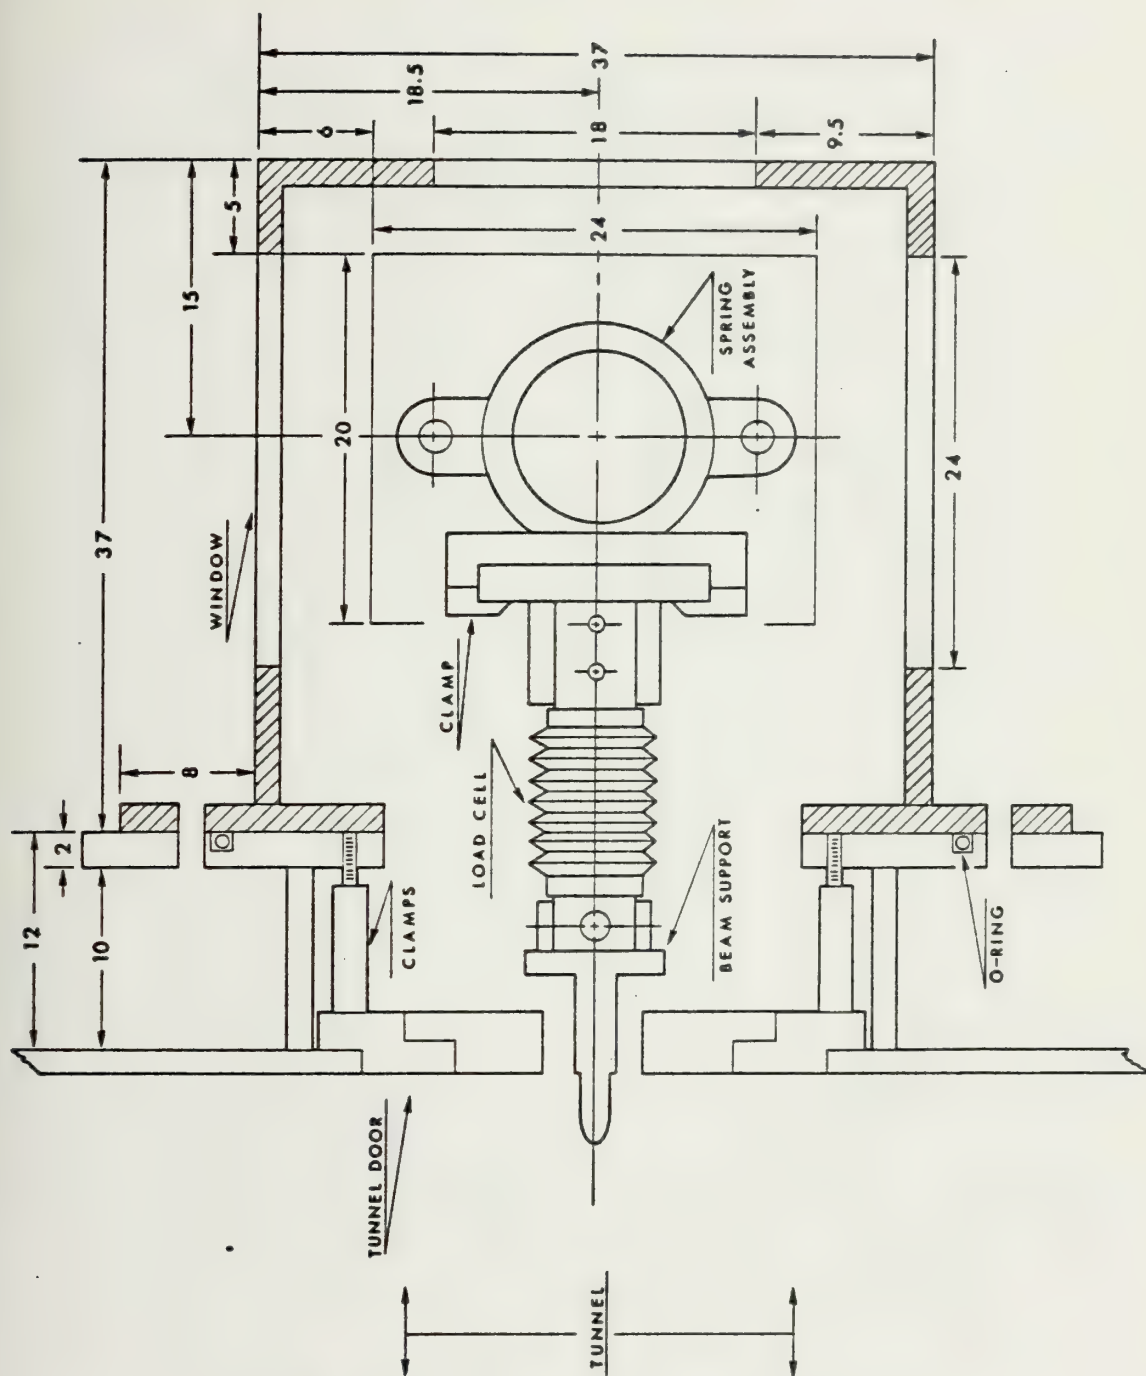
Top view of a cylinder-support mount and housing, (dimensions in cm)
